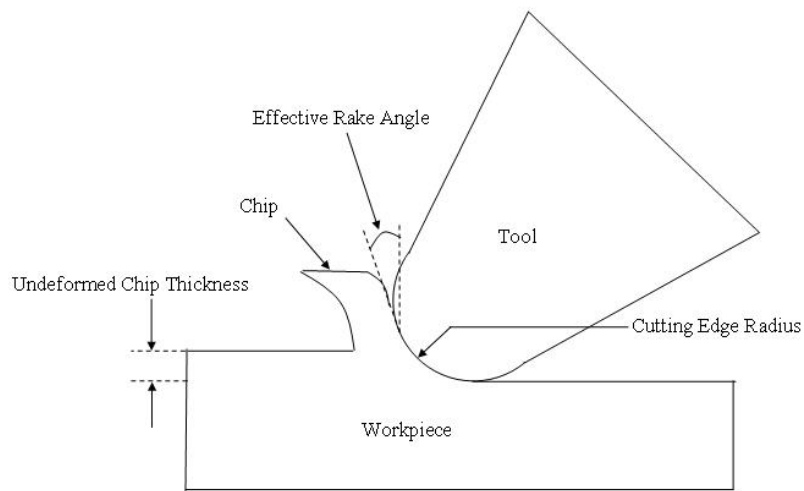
Schematic of Cutting Edge Radius of Cutting Tool
